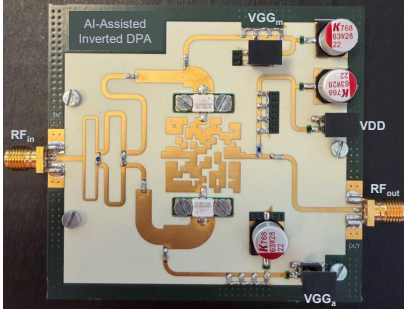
The fabricated prototype circuit with dimensions of 78 mm × 72 mm.
